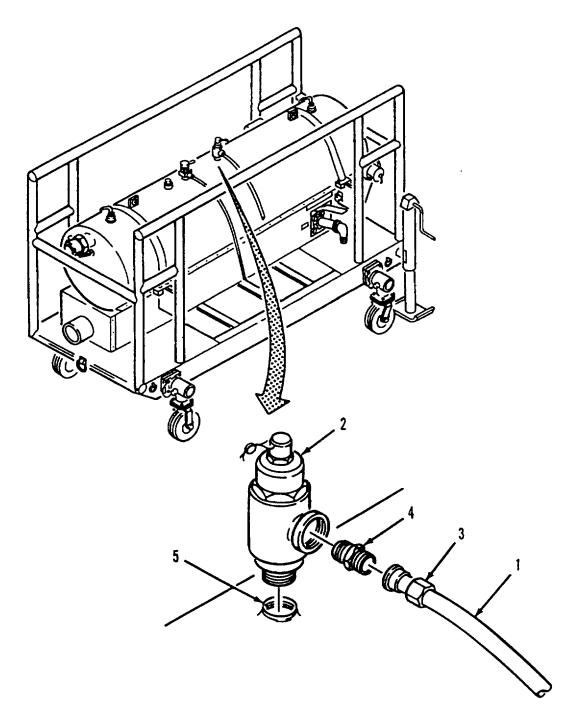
Pressure Relief Valve and Tubing Replacement.
